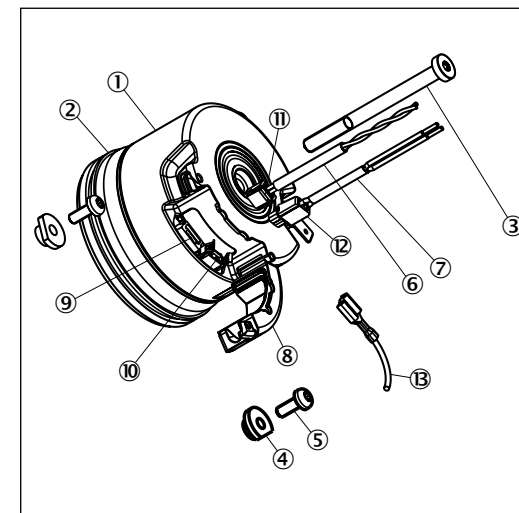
Assembly diagram for EFS50-0J/EFM50-0J/EF50-0K/EFM50-0K conical shaft and resolver support
